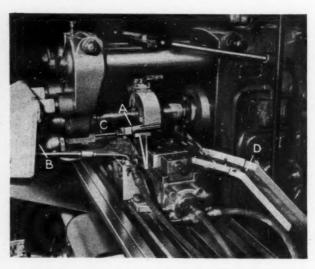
Archdale No. 1 Horizontal Milling Machine, Equipped for Cutting Flats on Cotter-pins at the Rate of 160 per Hour
